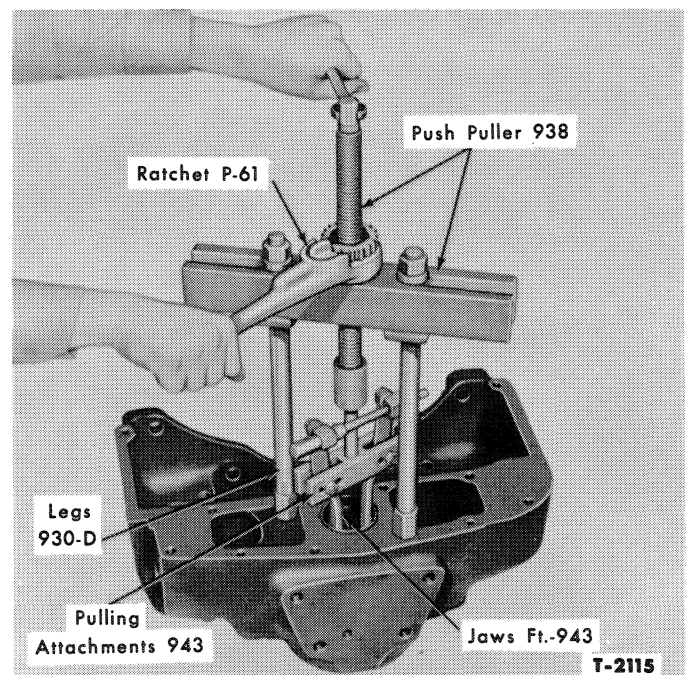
Pulling Pinion Shaft Upper Bearing Cup
